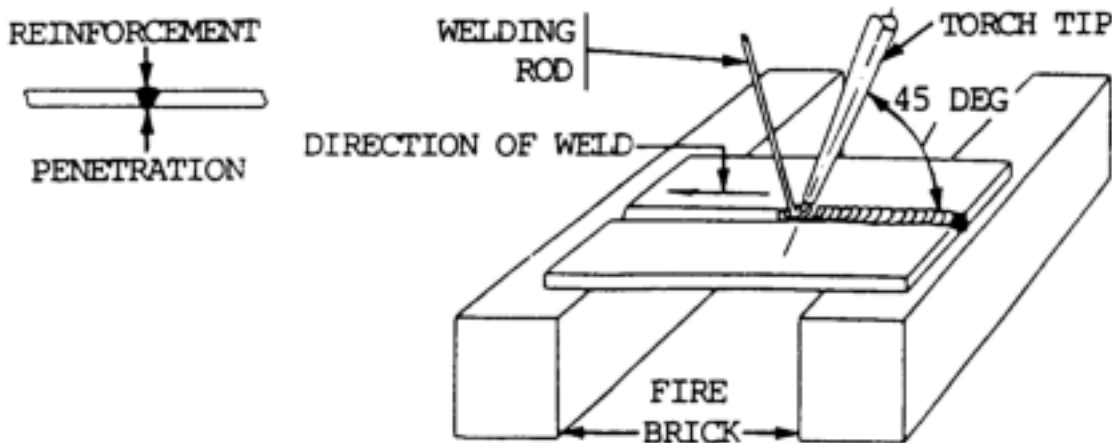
Position of rod and torch for a butt weld in a flat position.
